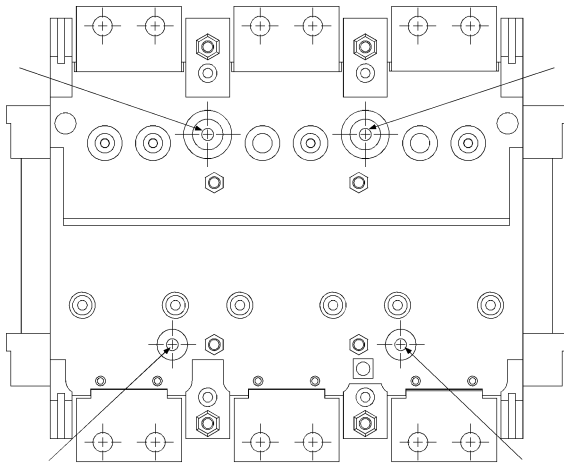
Locations of the 1/4-20 x 3/8-inch deep screw inserts for mounting the breaker in equipment, 800-2000 A frames.
